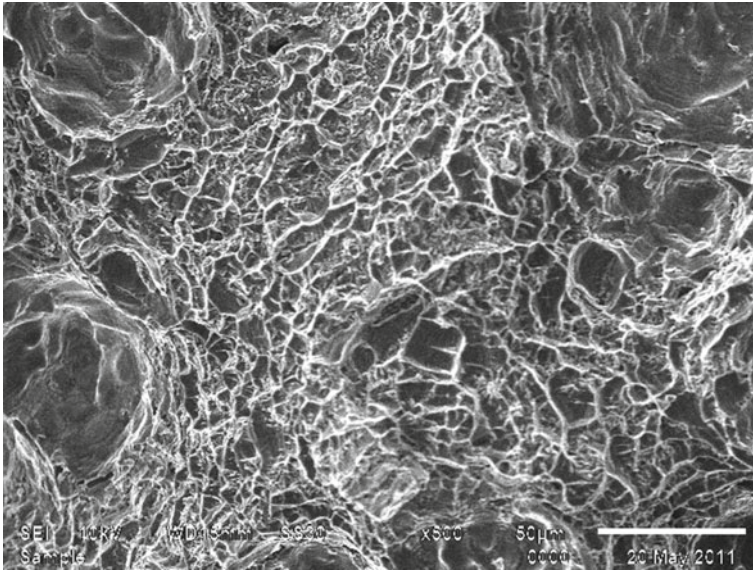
Tensile test specimen fractograph at current (100 amp)
